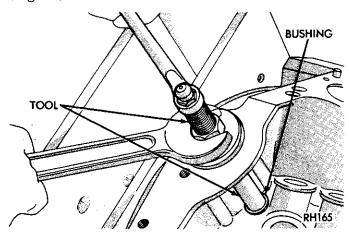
Burnishing Distributor Drive Shaft Bushing
